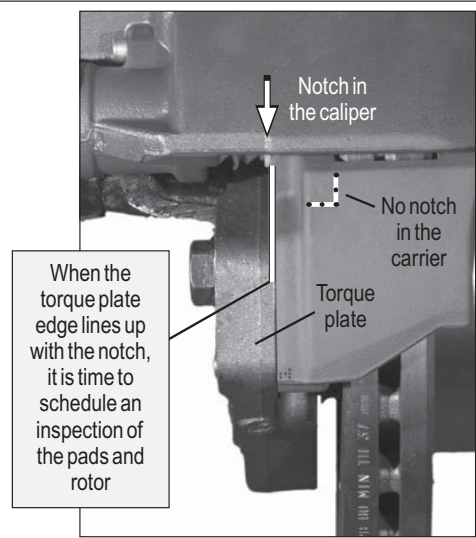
CARRIER WEAR INDICATOR NOTCH AND BACKING PLATE ALIGNMENT
